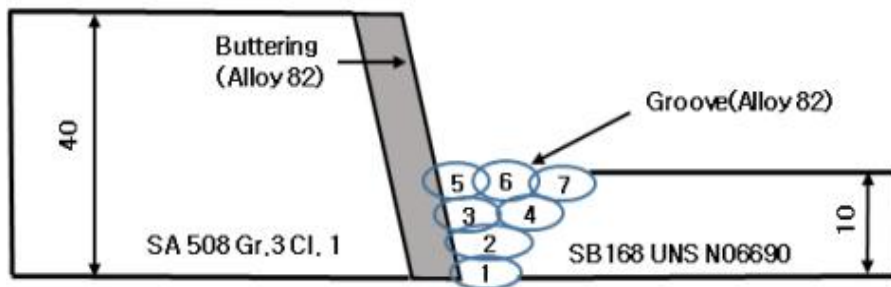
Alloy 82 buttering and welding schematic diagram.
